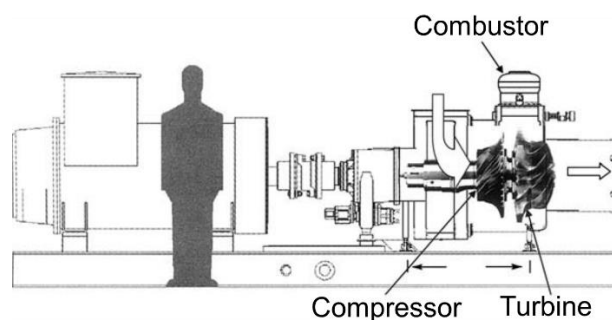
Gas turbine system is divided into three sections; compressor, turbine and combustion chamber. Source: [2]
